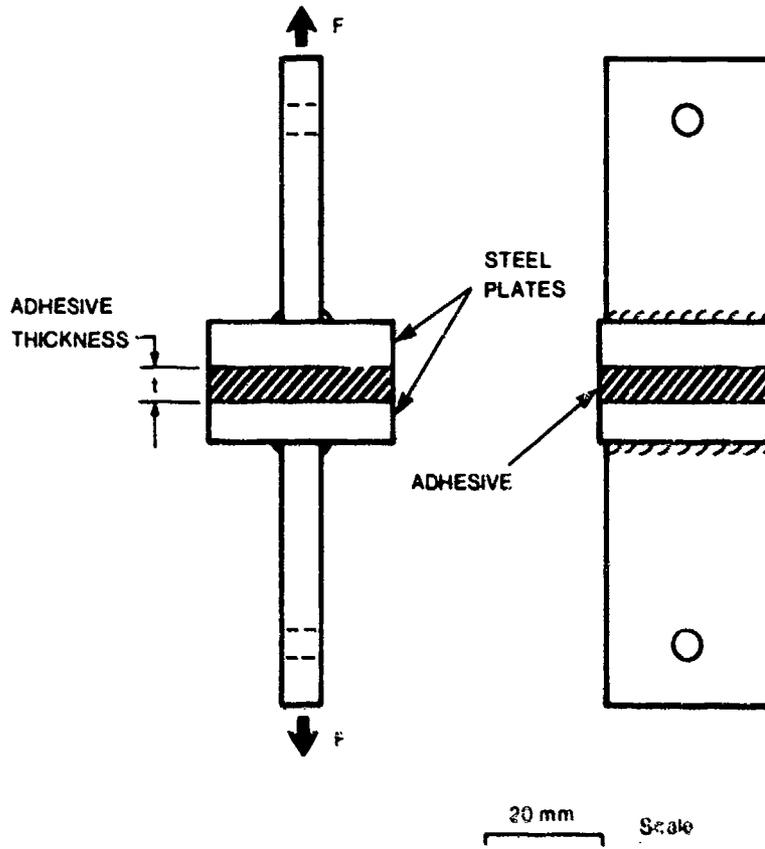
A Test fixture for tensile testing of epoxy adhesive.
